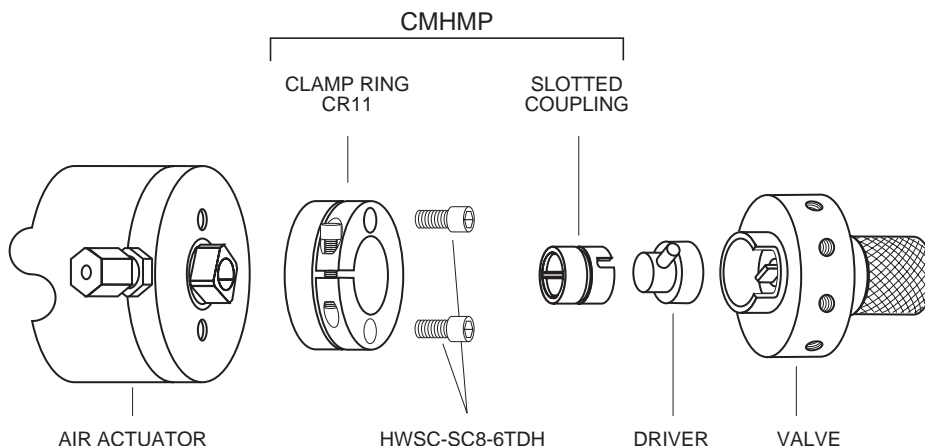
Valco valve (no mounting holes) on an actuator with closemount hardware
